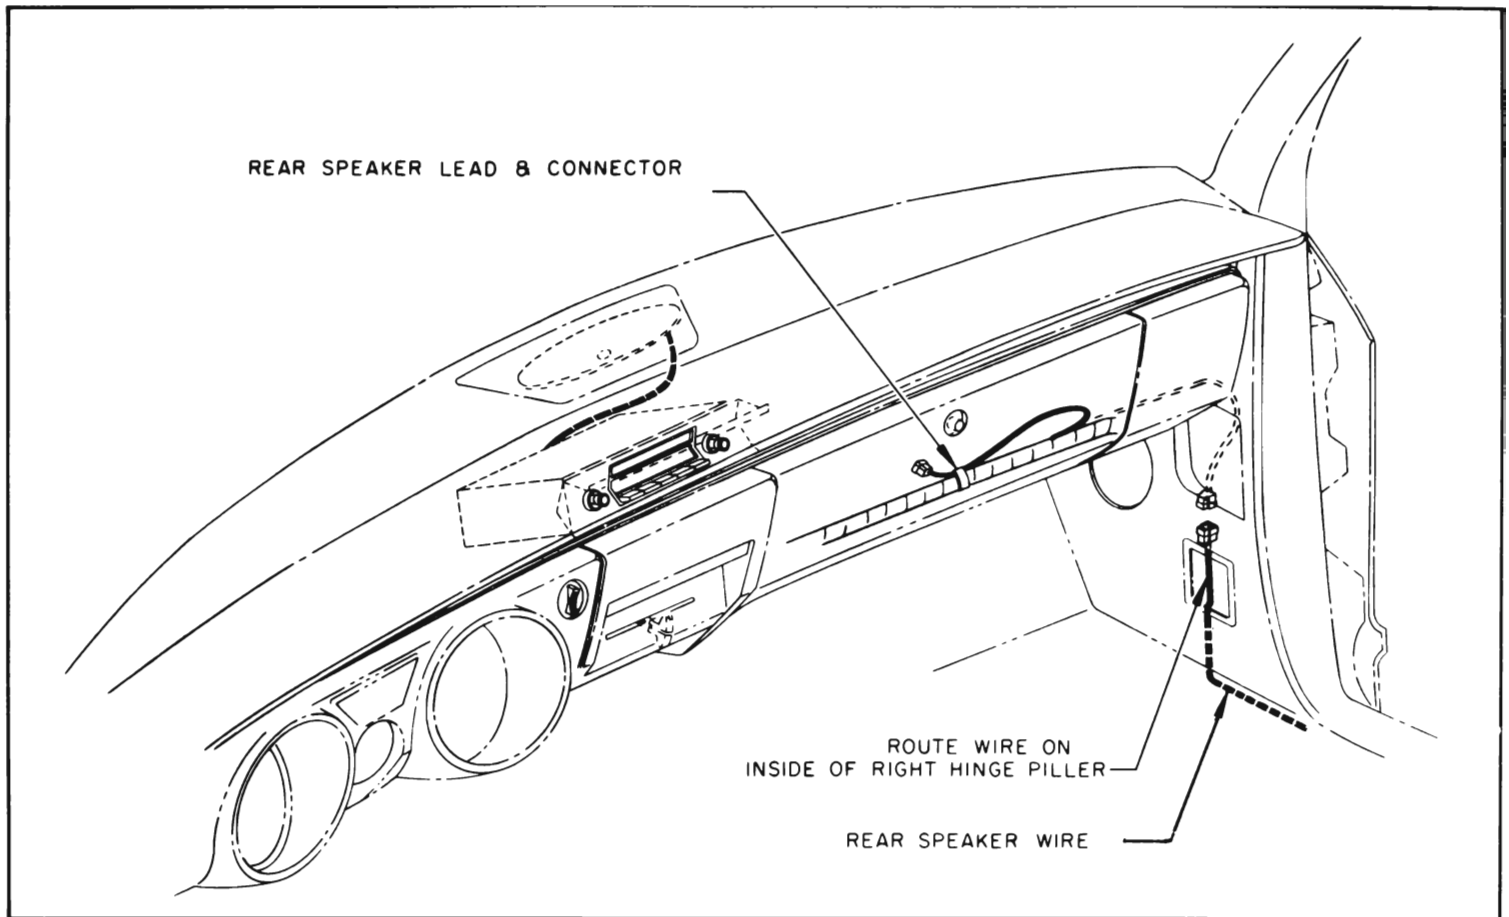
Rear Speaker Wire Routing - 45000, 46000 and 48000 Series
